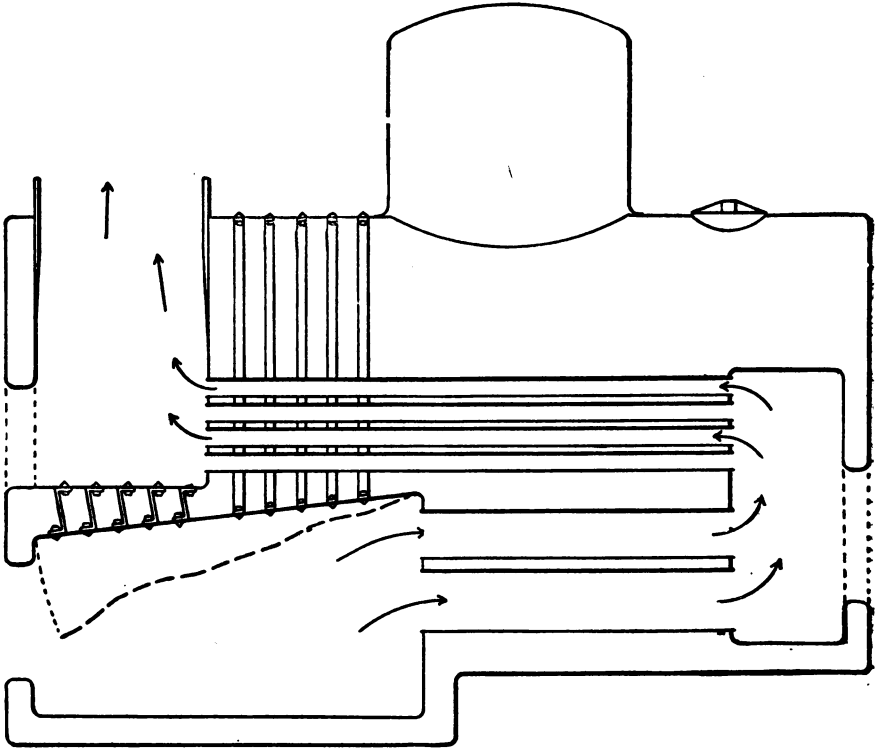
SECTIONAL VIEW OF THE "RAMBLER'S" BOILER.
